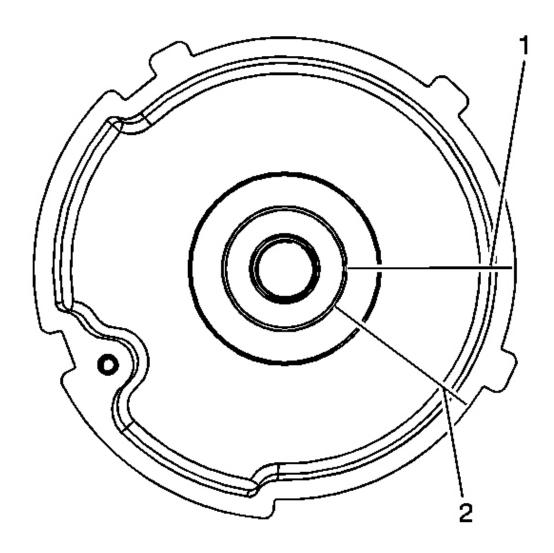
Scribing Or Drawing 2nd Line Courtesy of GENERAL MOTORS CORP.
